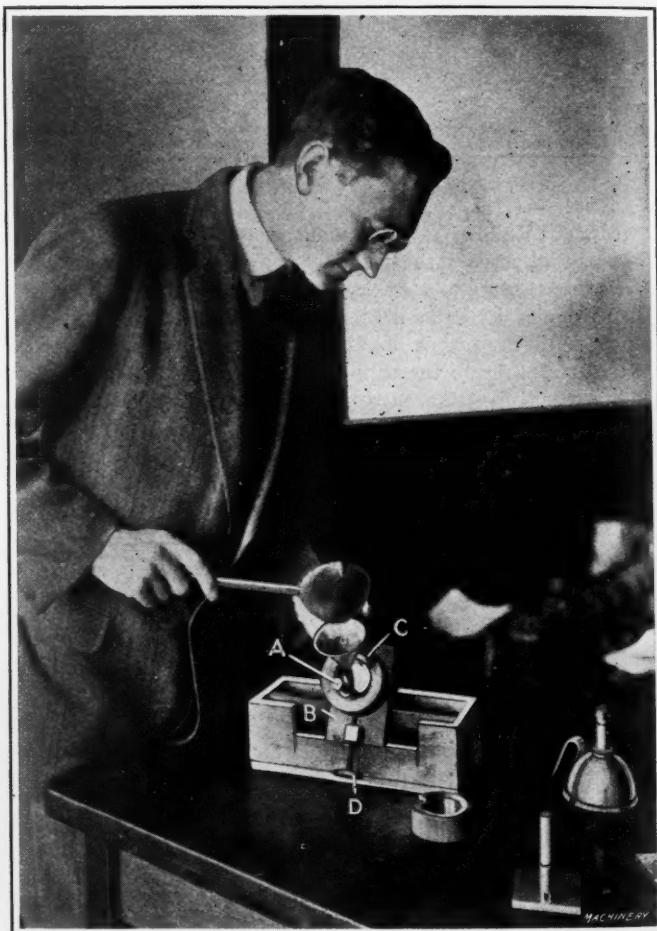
Making a Cast of a Section of a Ring Gage Thread preparatory to testing by Projection Method
